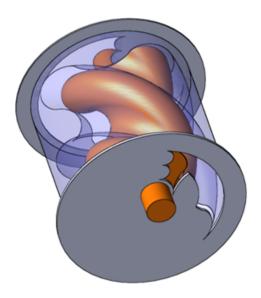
Model of the Internally Geared Screw Machine (IGSM)
